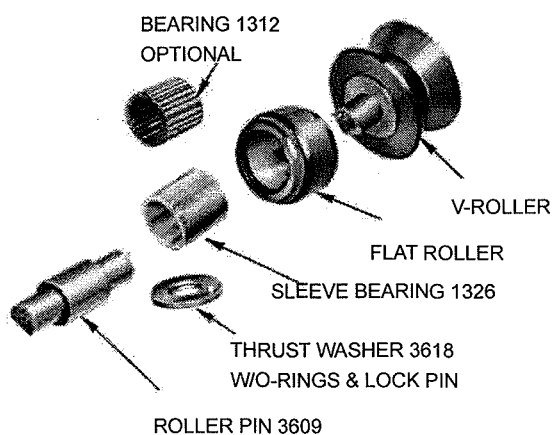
20-HDP Heavy duty pin drive roller kelly bushing.
